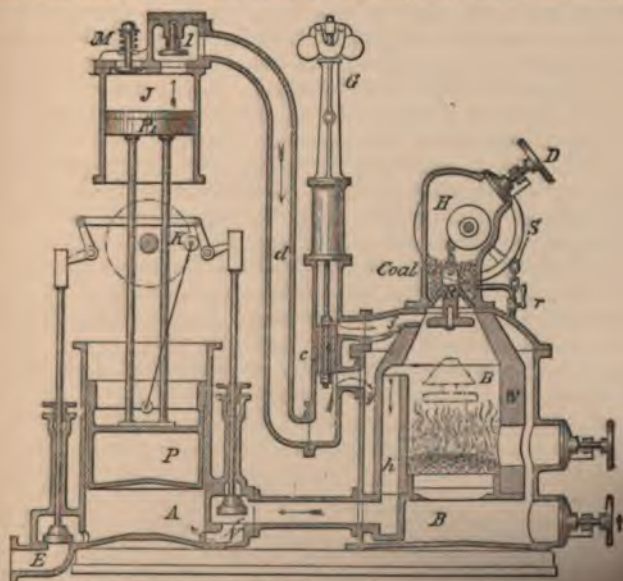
Buckett Hot Air Engine—Single Cylinder.
